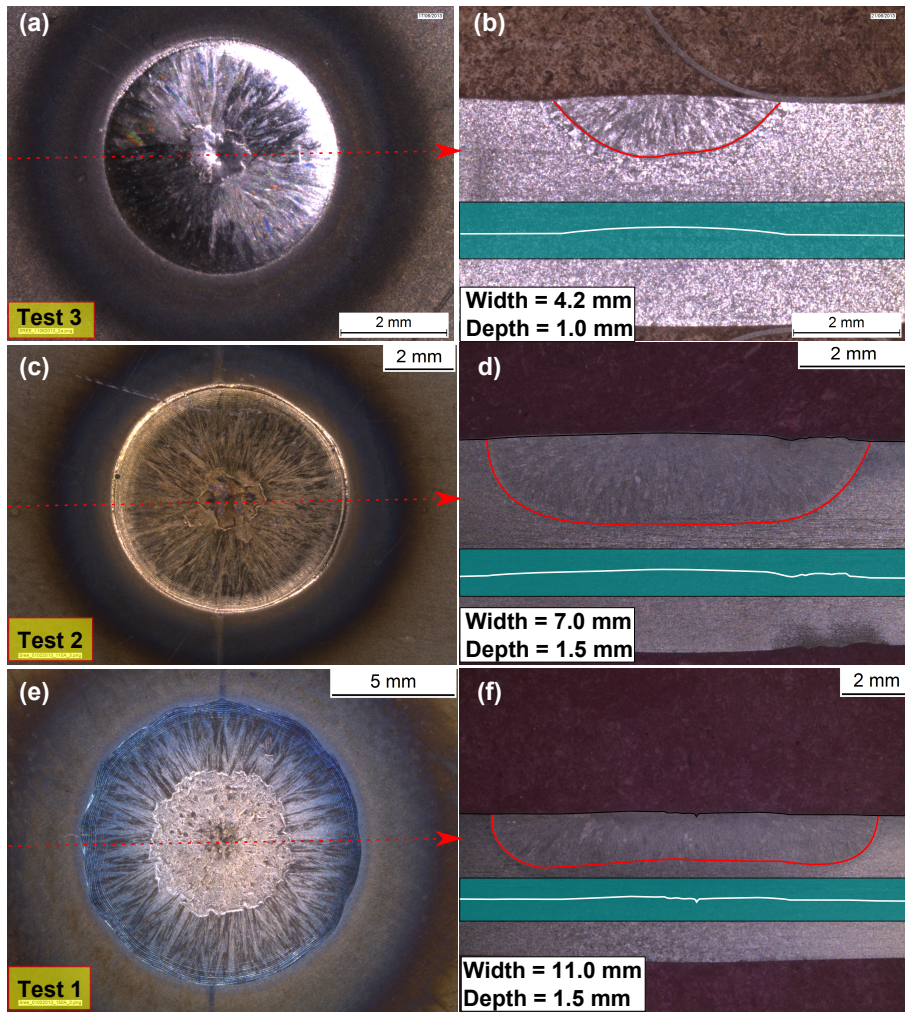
Weld pool shape Top view (a, c, e) and corresponding cross section cut through the bead center (b, d, f) for 70 A, 110 A and 150 A; heating for 5 s on AISI 304L samples; weld bead top surface profile is highlighted in figures b, d, f
